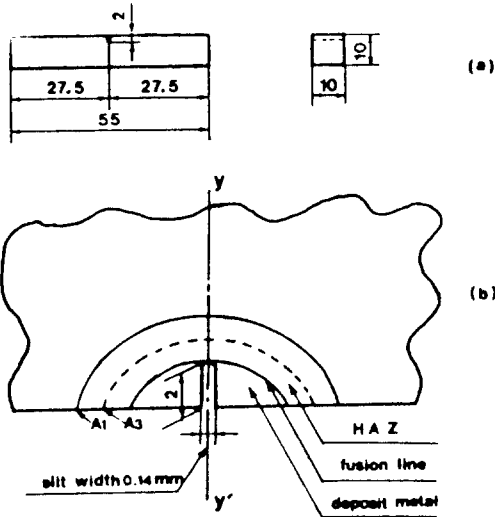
Specimen dimension for COD test and schematic illustration of slit location.
